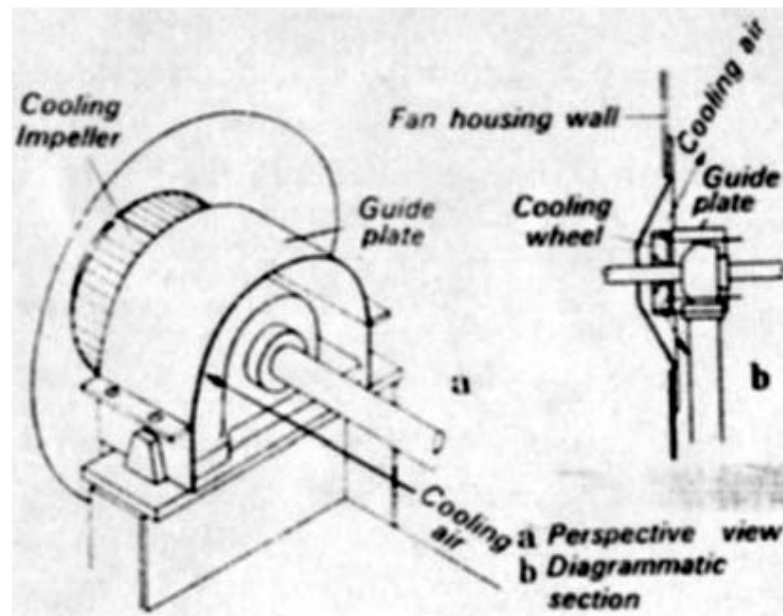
(a and b) Bearings cooled by means a special drum impeller.
